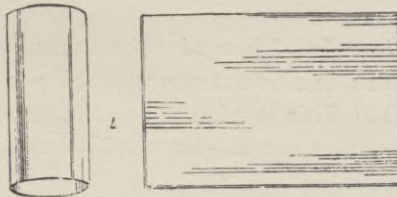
A window-glass tube is cut lengthwise, then spread out flat.
